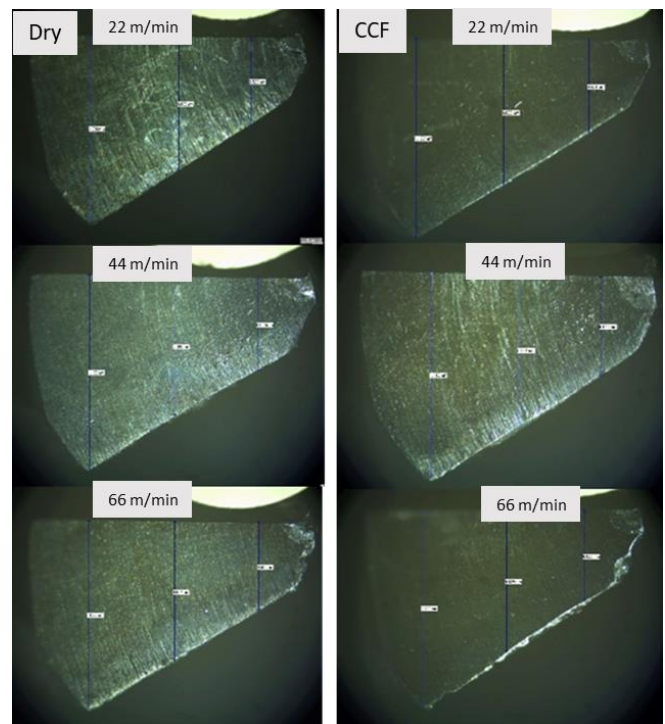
Microscopic images of tool wear after drilled 50th holes when drilling Al 7075 in dry and conventional cutting fluid conditions.
